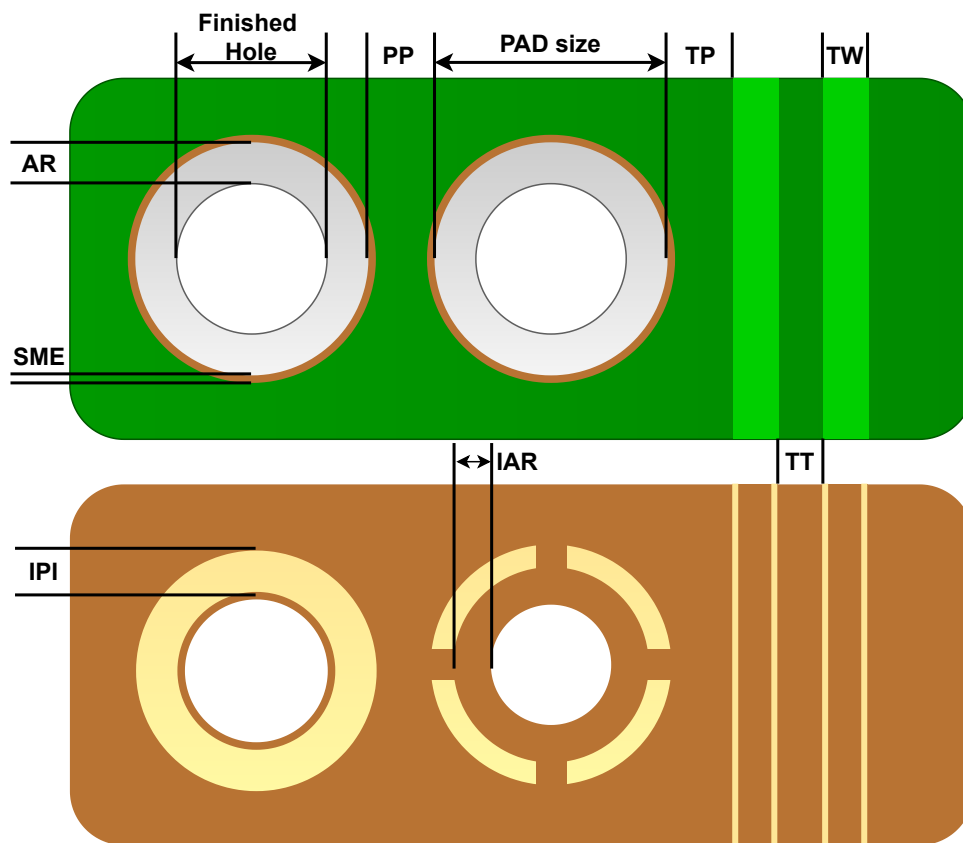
Cutout of a PCB with vias and traces, illustrating the most common limitations specified by PCB manufacturers
